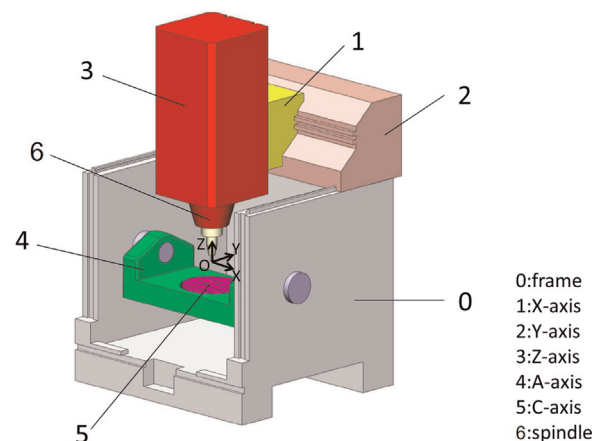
The structure of a tilting rotary table type five-axis machine tool.
